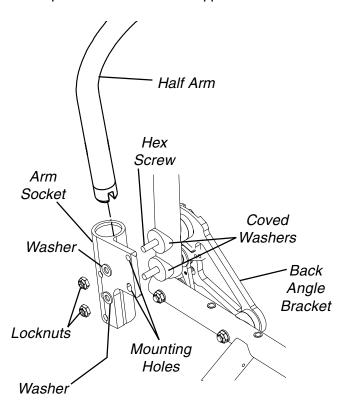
INSTALLING THE HALF ARM SOCKET
